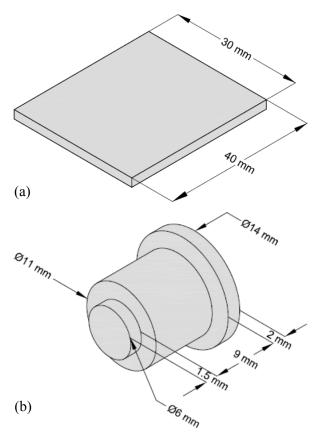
Specimens for: (a) corrosion tests and (b) sliding wear tests
